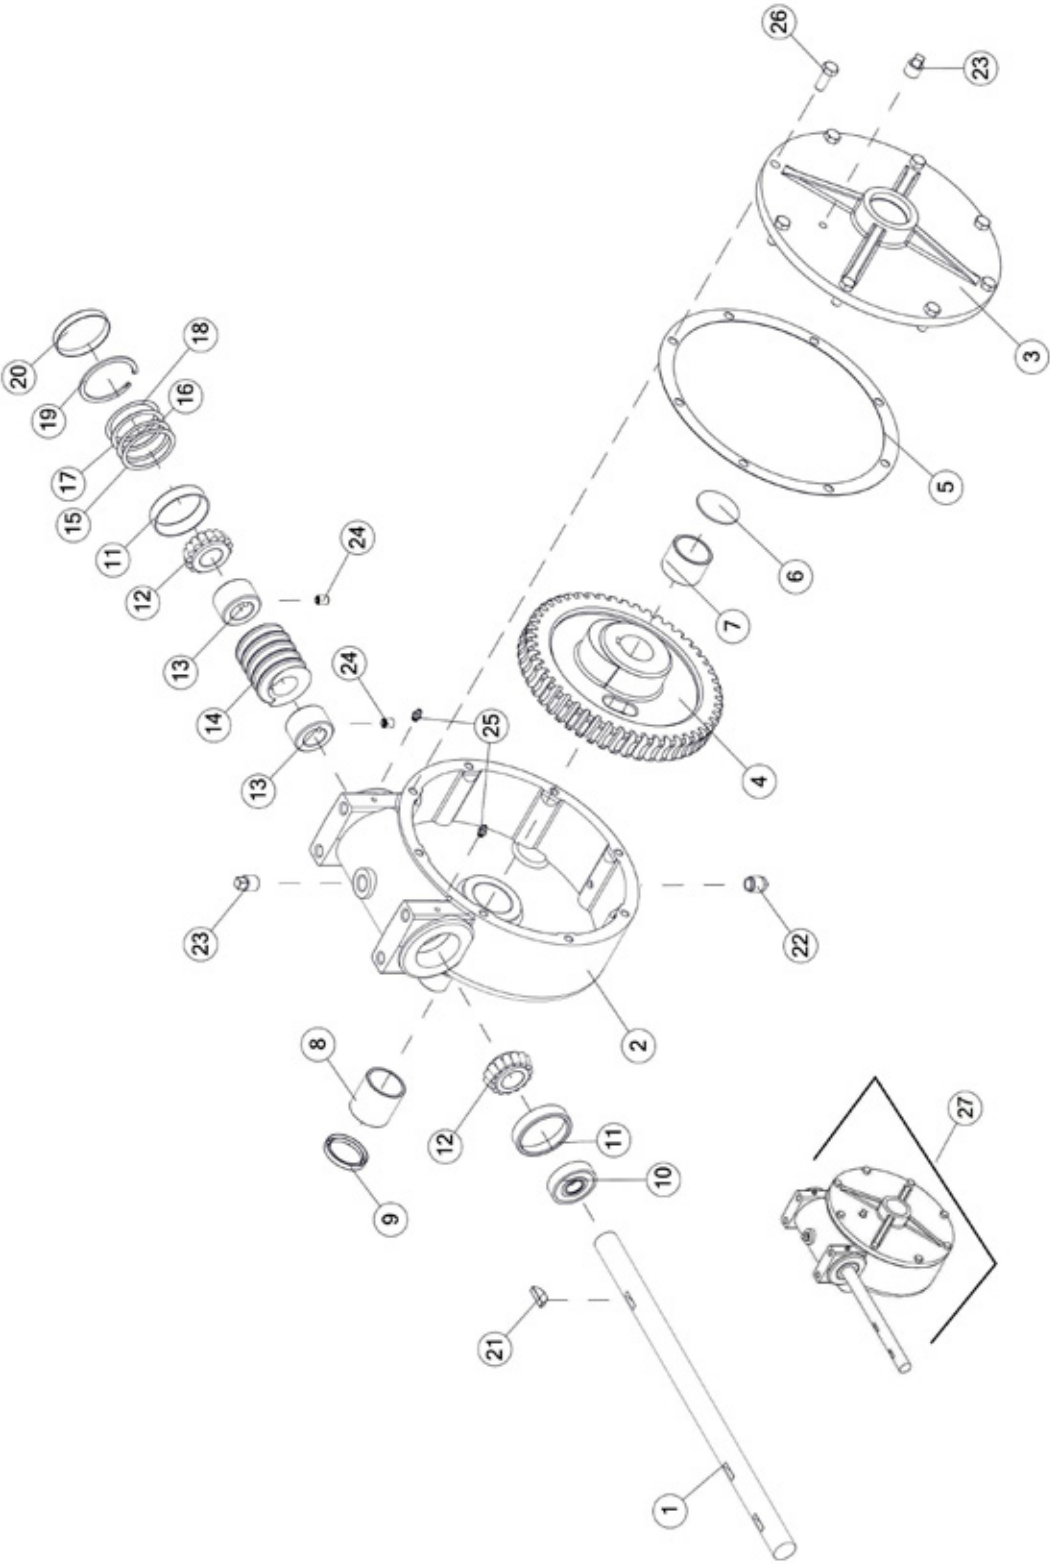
OPTIONAL HYDRAULIC DRIVE ASSEMBLY
